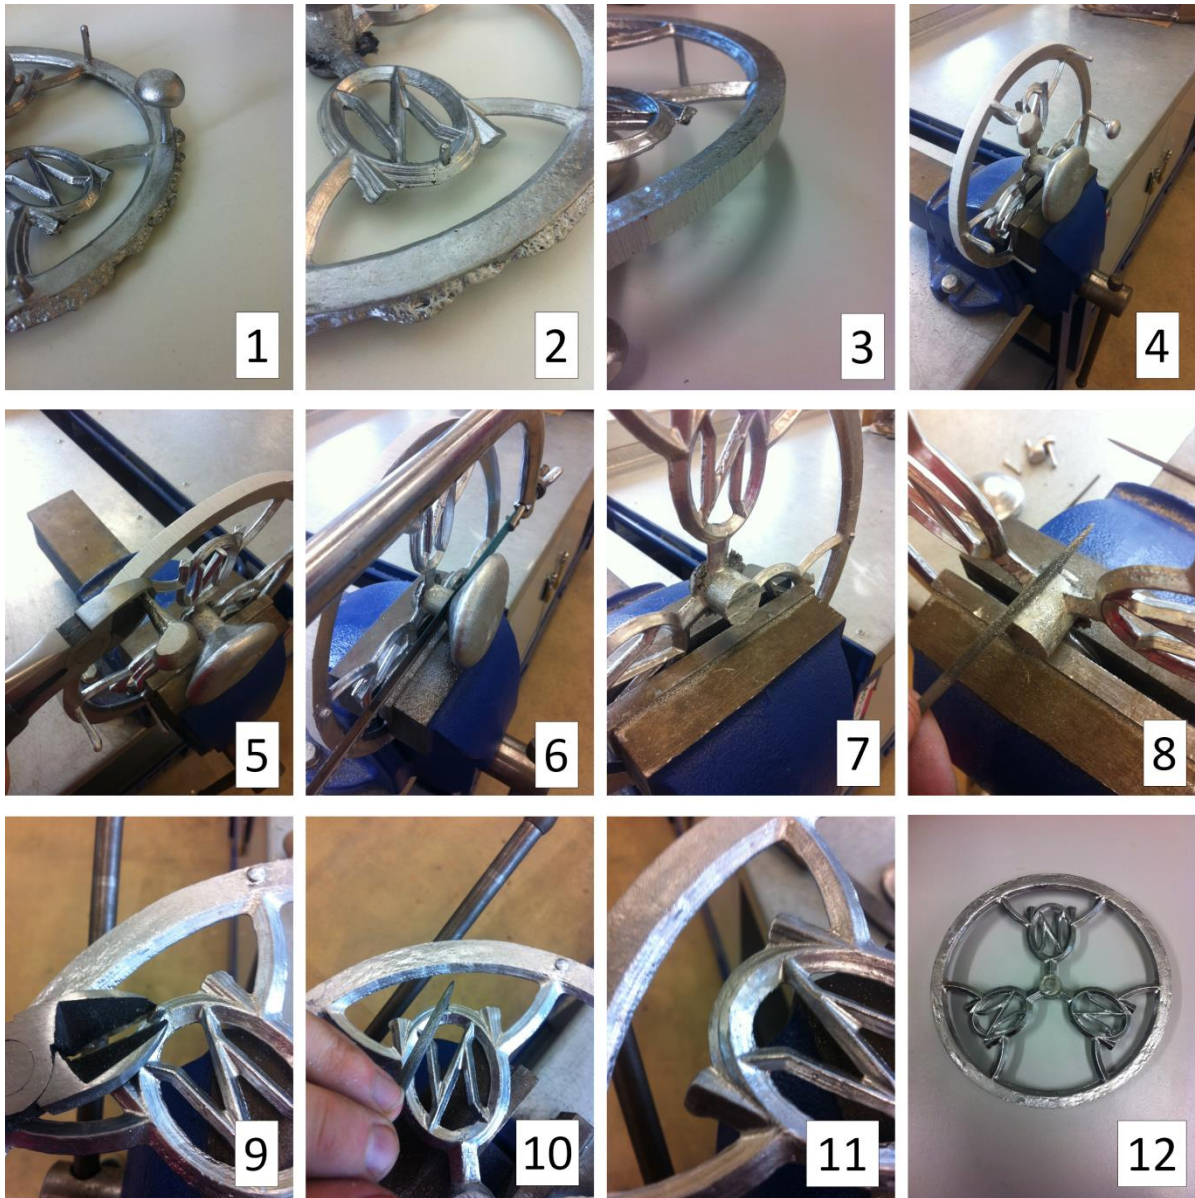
Sand Casting Post Processing of Uno Pulley Wheel
